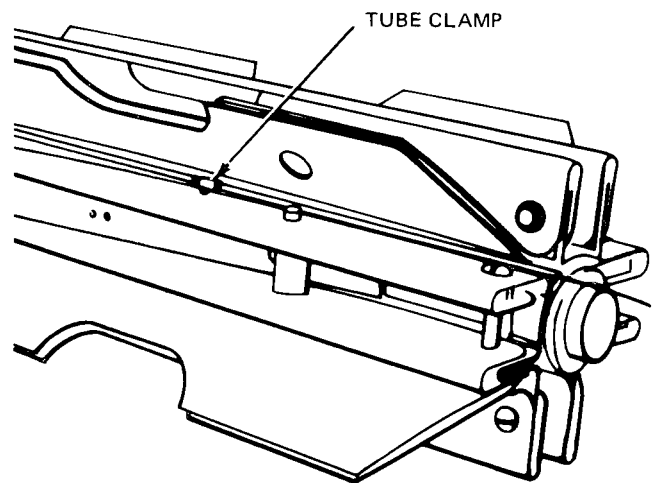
Fin Release Wire Guide Tube and Clamp Installed (Mod 1 Fin)
